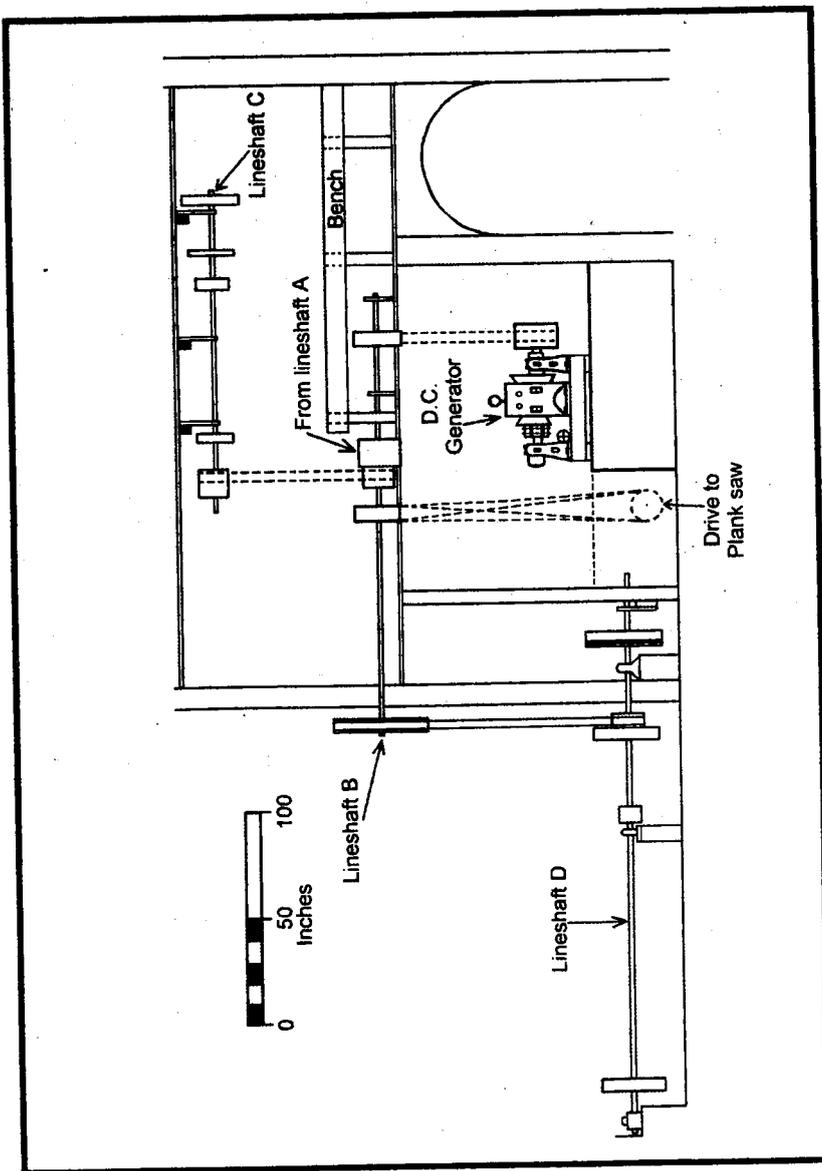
A cross sectional view through the mill at Section E on Figures 11 & 12 showing lineshafts B, C & D and the D.C. Generator.
